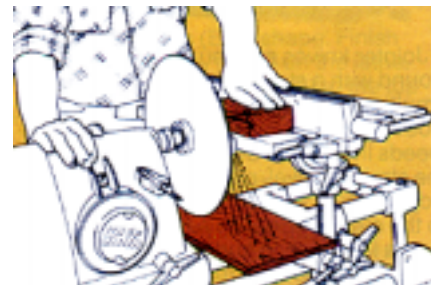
Using offset fence technique, grind Knives to remove nicks.
